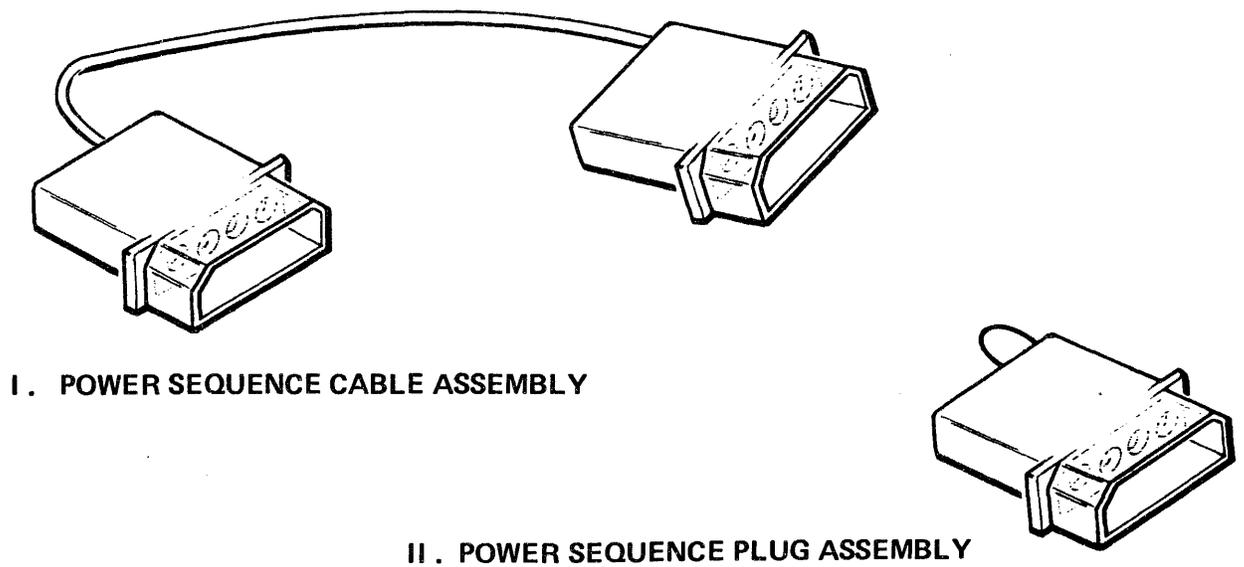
A Power Sequence Plug and Cable Assembly
